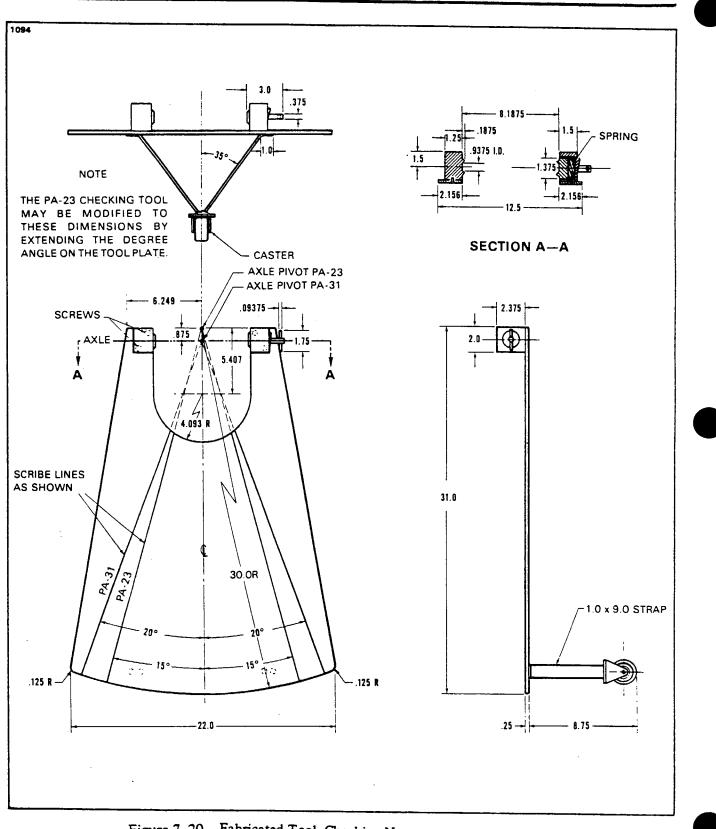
Fabricated Tool, Checking Nose Wheel Alignment
